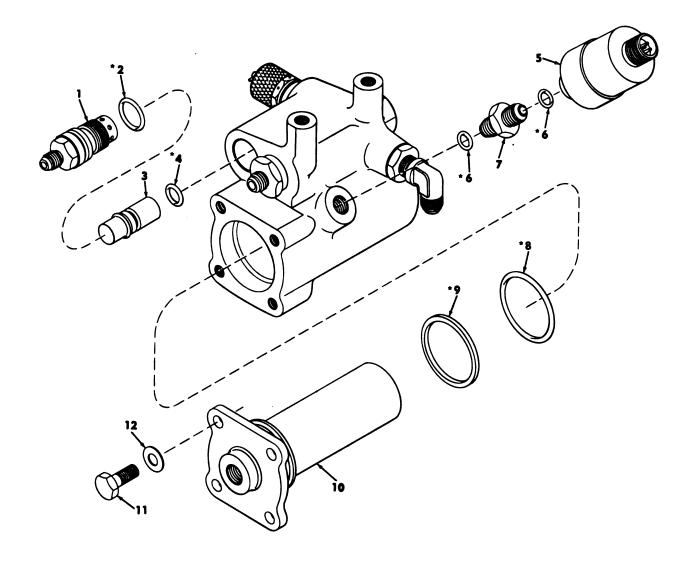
MANIFOLD ASSEMBLY, HYDRAULIC DUMBING UNIT / 9019893/
